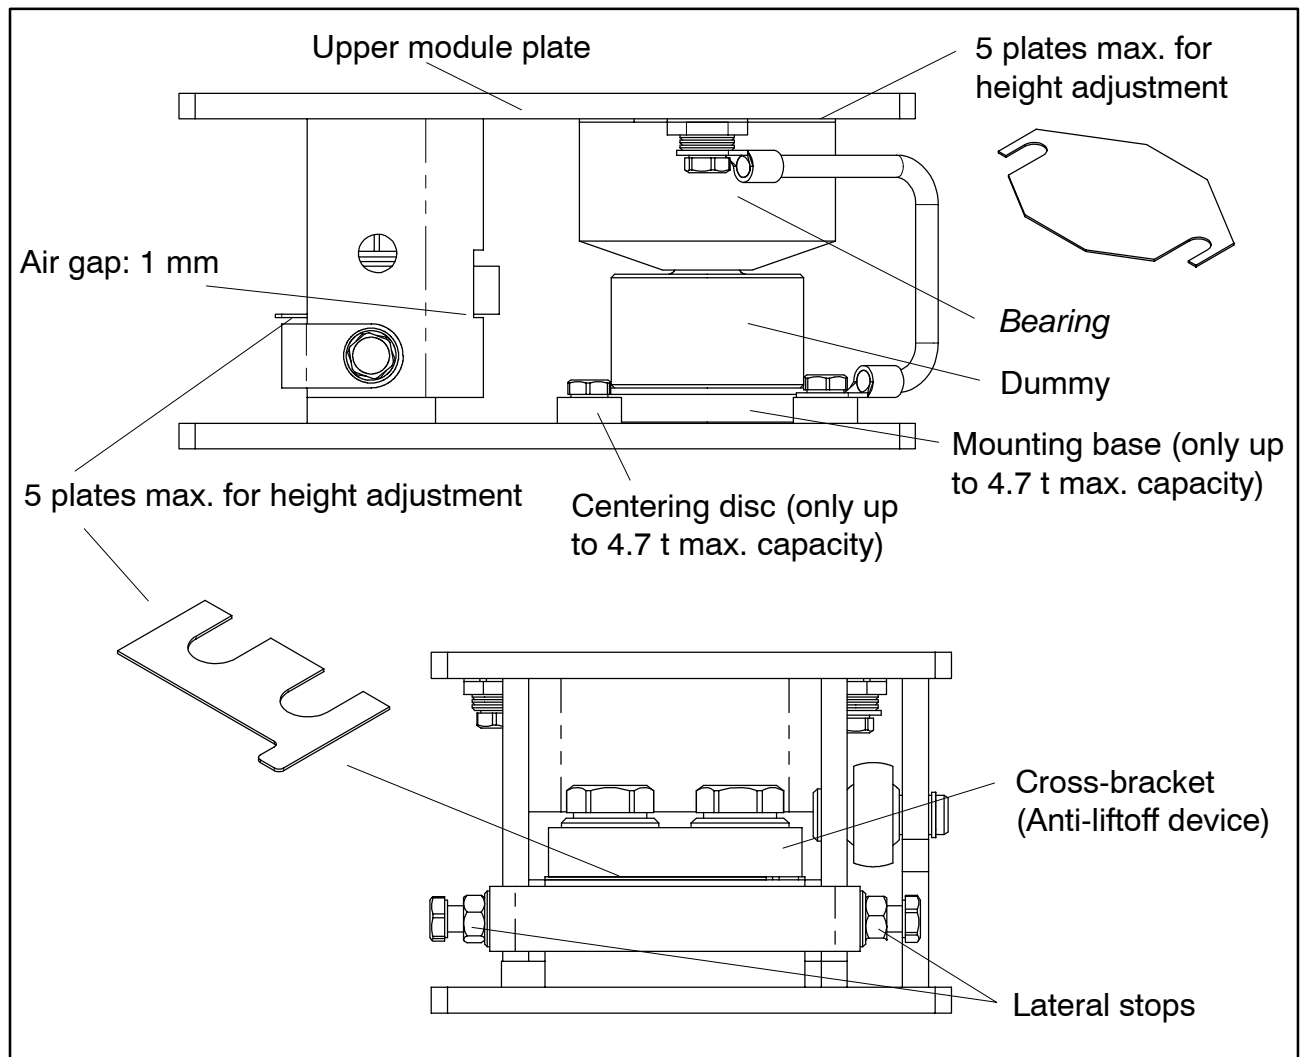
Fitting of the spacer plates with 4.7 t version
